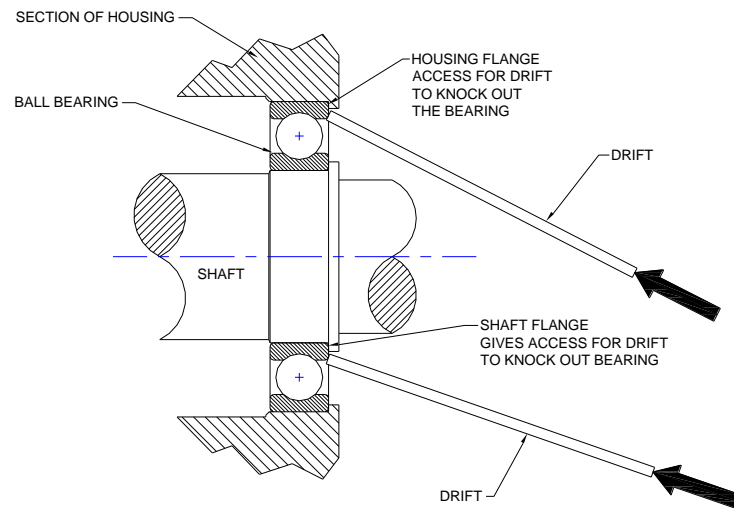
Provision for Removal of Bearings from a Bearing Housing and Shaft [4.24]
